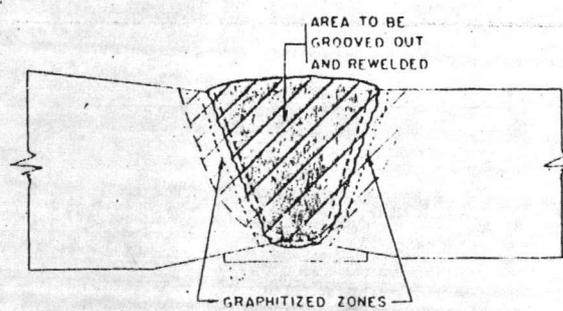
Sketch illustrating procedure for partial grooving out and rewelding of joint with graphitization on both sides of the weld
